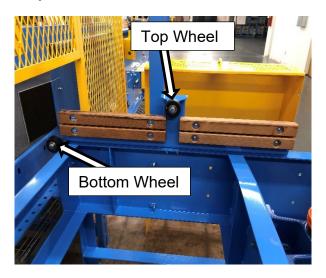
Pusher Frame Assembly Wheels - Blade Removed
